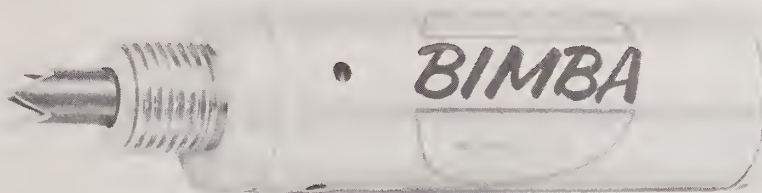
Pneumatic cylinder designed for punching holes in plastic film. Cutter is part of piston rod.
